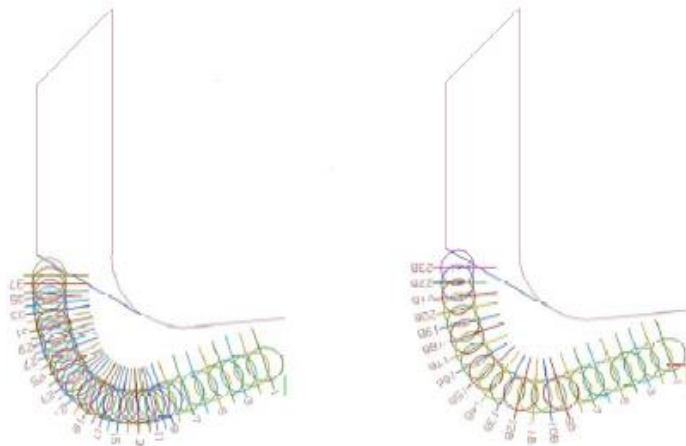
Single-set (left) and Track-set (right) cutters layout [1]
